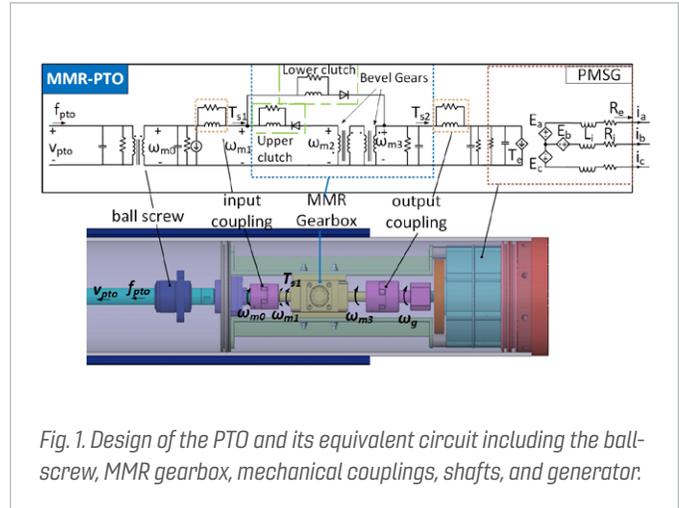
Design of the PTO and its equivalent circuit including the ball screw, MMR gearbox, mechanical couplings, shafts, and generator.
